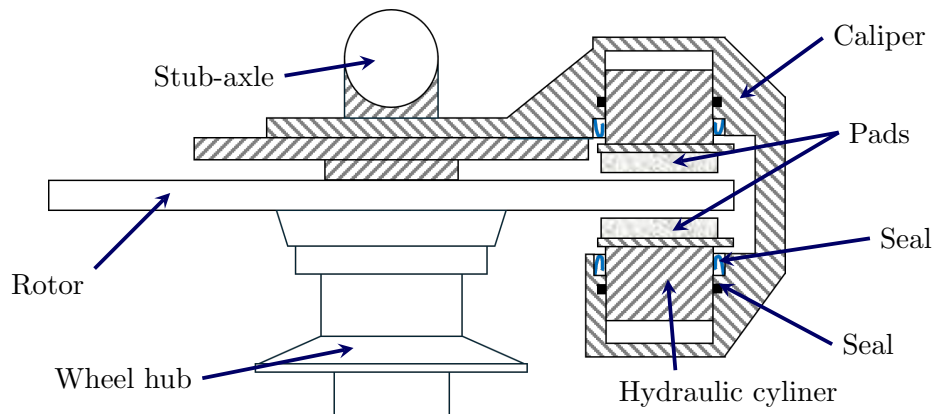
Brake assembly schematic of a standard hydraulic disc brake system.
